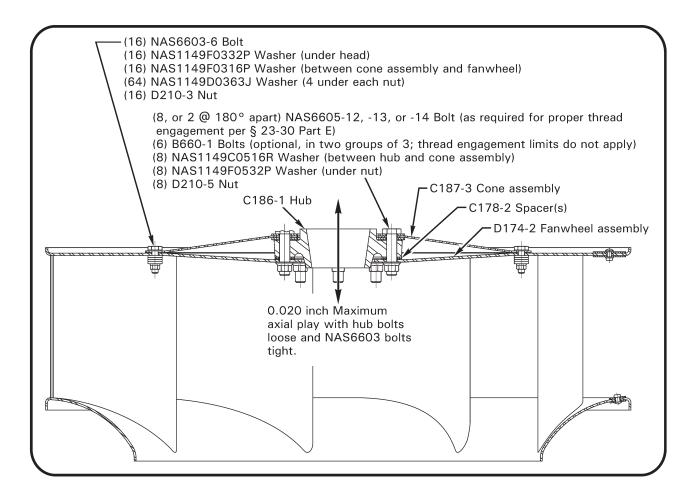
D174-2 FANWHEEL ASSEMBLY
